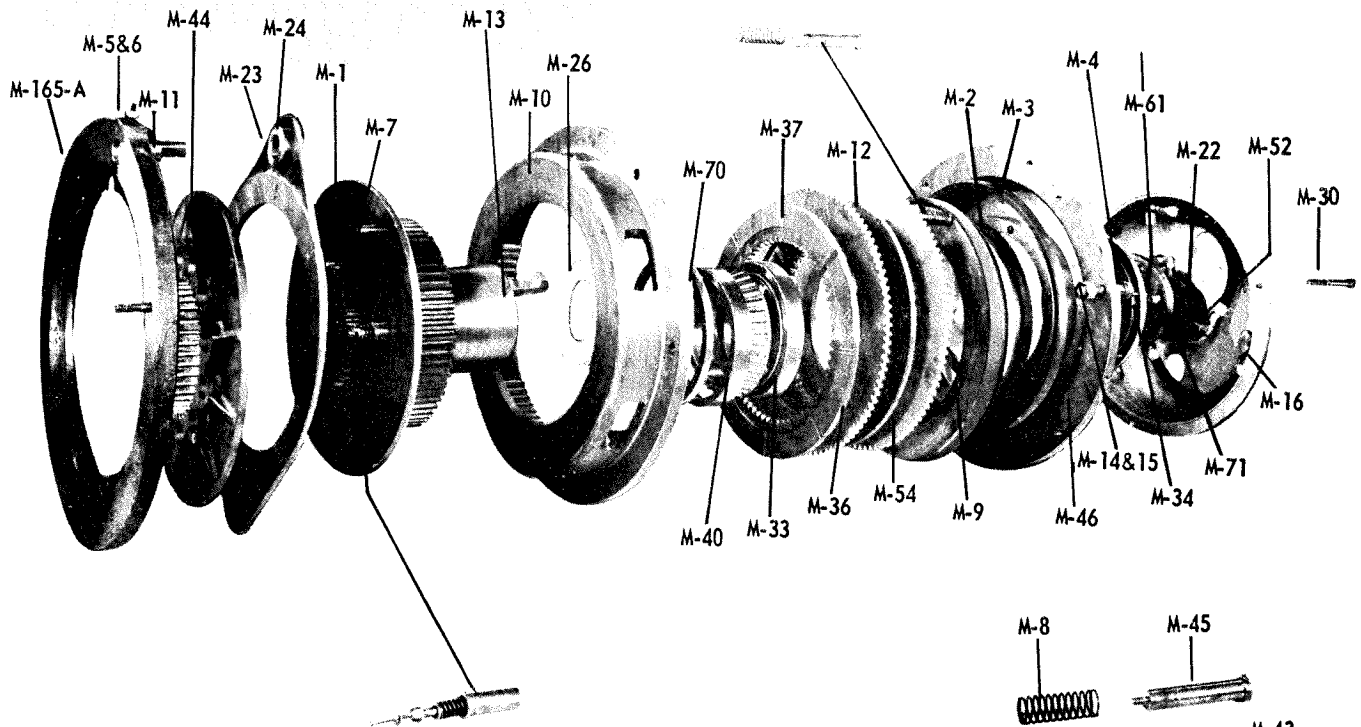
EXPLODED VIEW OF PARTS OF TYPE "M" CLUTCH.
